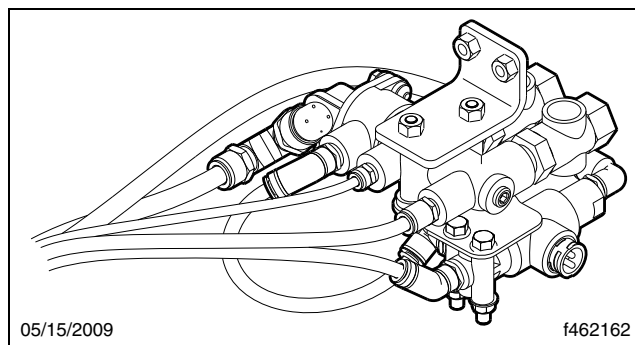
, Rear Modulator Valve Assembly with ATC Valve
